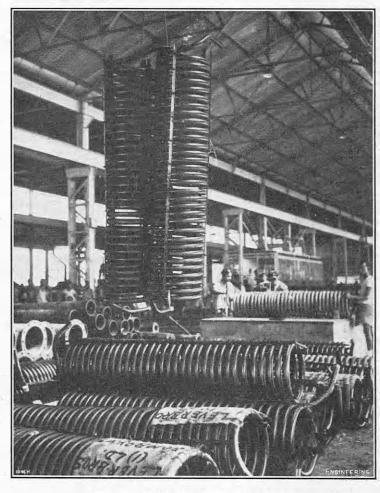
$1\frac{1}{4}$ -In. Steam Heating Coils.
